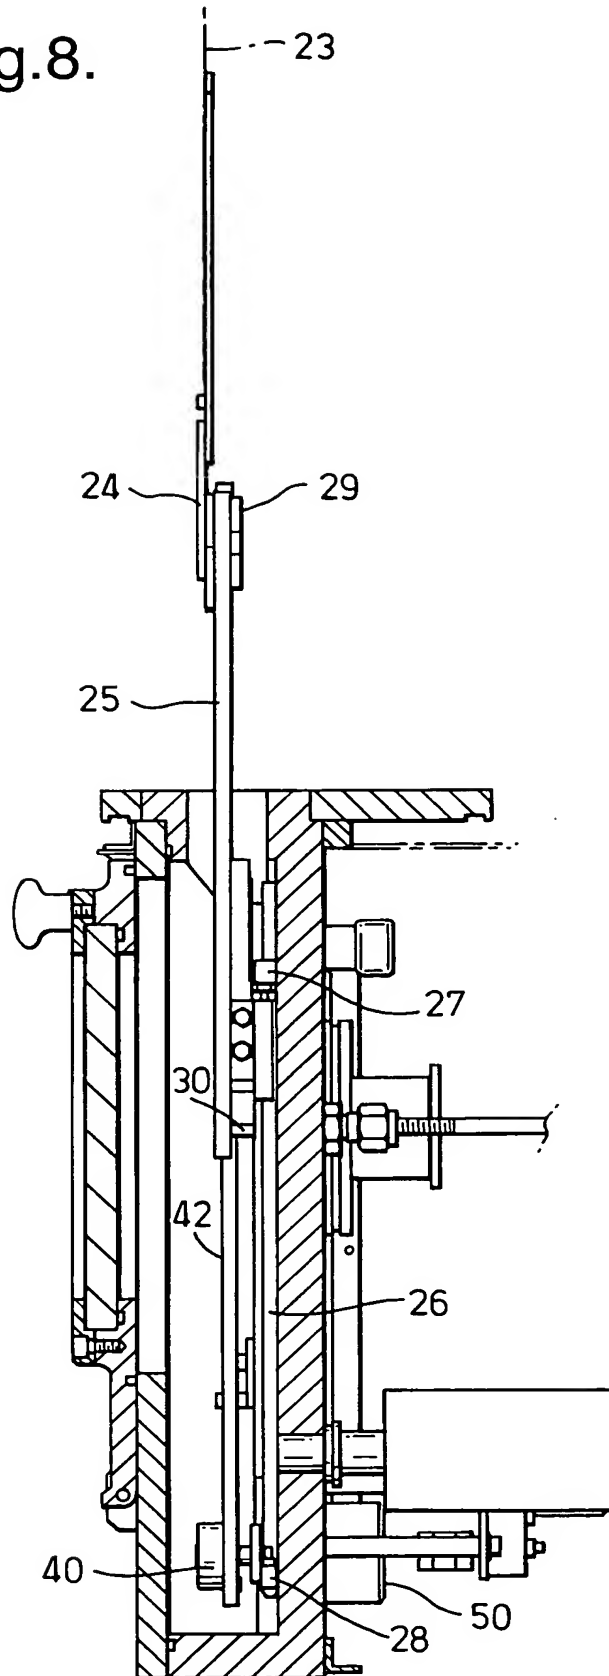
is a cross-sectional view of a mechanical assembly, showing a shaft (23) passing through a housing. The shaft has a series of steps or changes in diameter. A component (24) is mounted on the shaft, and a nut (29) is used to secure it. Below this, a component (25) is shown. The shaft passes through a housing with various internal components. A component (27) is shown on the right side, and a component (30) is shown on the left side. A component (42) is shown in the center. A component (26) is shown on the right side, and a component (40) is shown on the left side. A component (28) is shown on the right side, and a component (50) is shown on the left side. The diagram is a technical drawing with hatching to indicate different materials and cross-sections.
